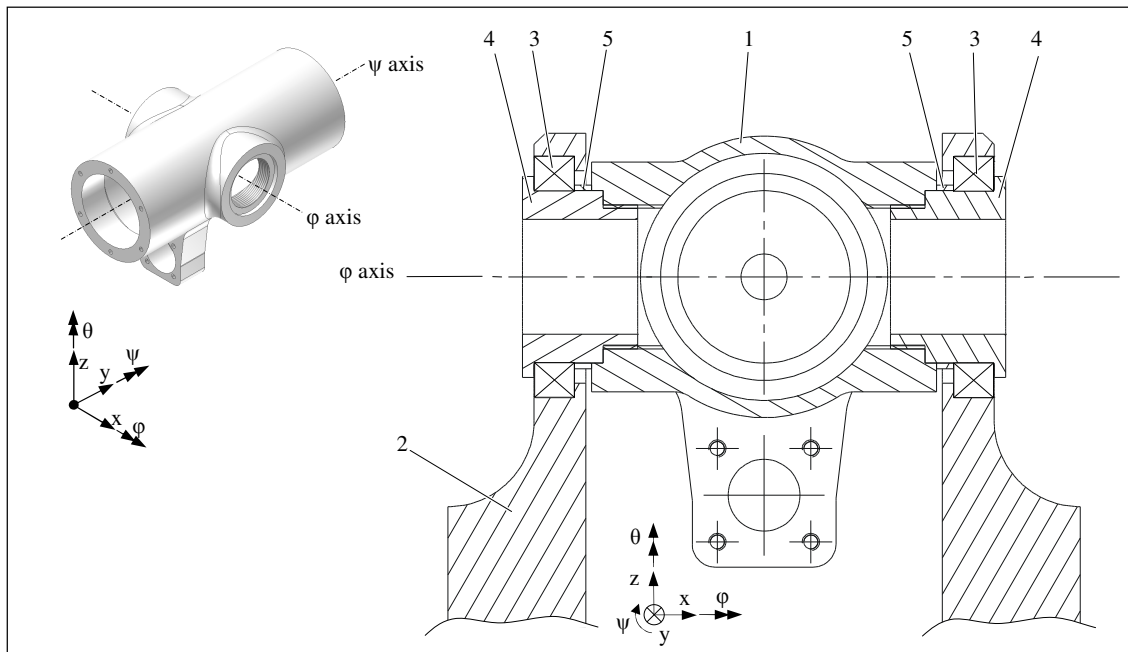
Isometric view of a right  $\psi$  tube (left). Section view of hip  $\phi$  joint, actuation made invisible (right):  $\psi$ -tube (1), upper leg hip connector (2), single row deep groove ball bearings (3), bushes (4), distance rings (5).
